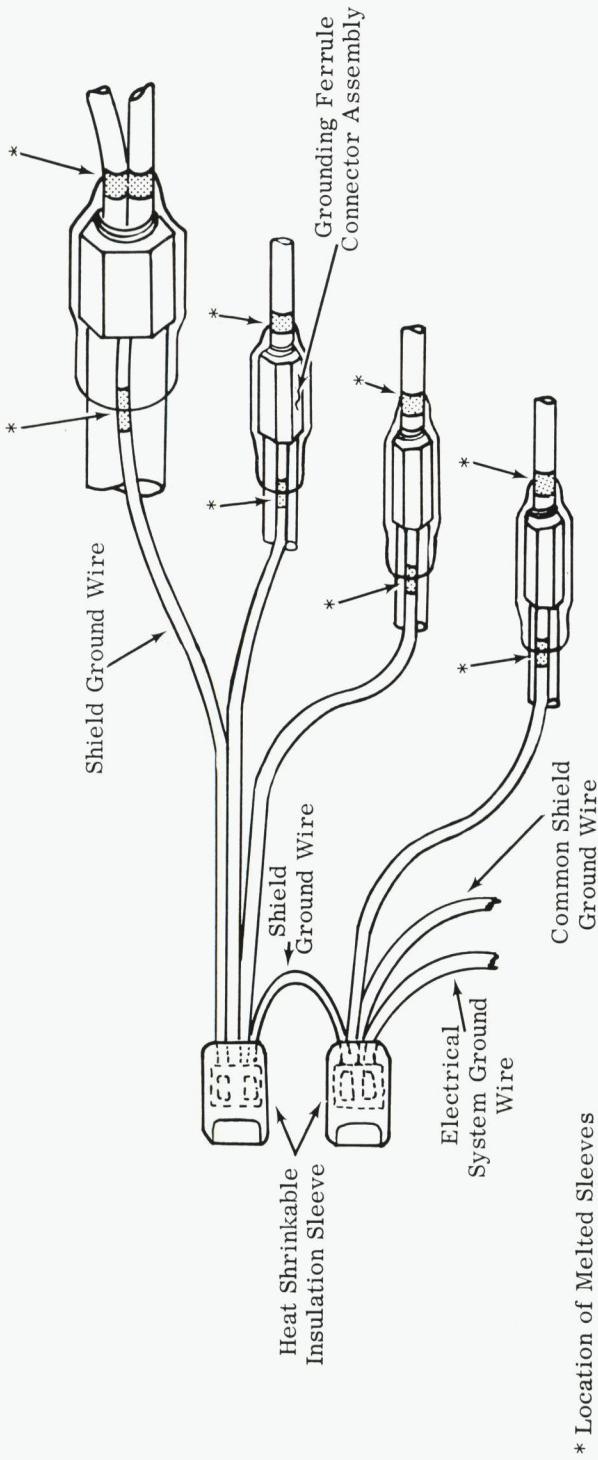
Connecting Groups of Shield Ground Wires to Electrical System and Common Ground Wire
